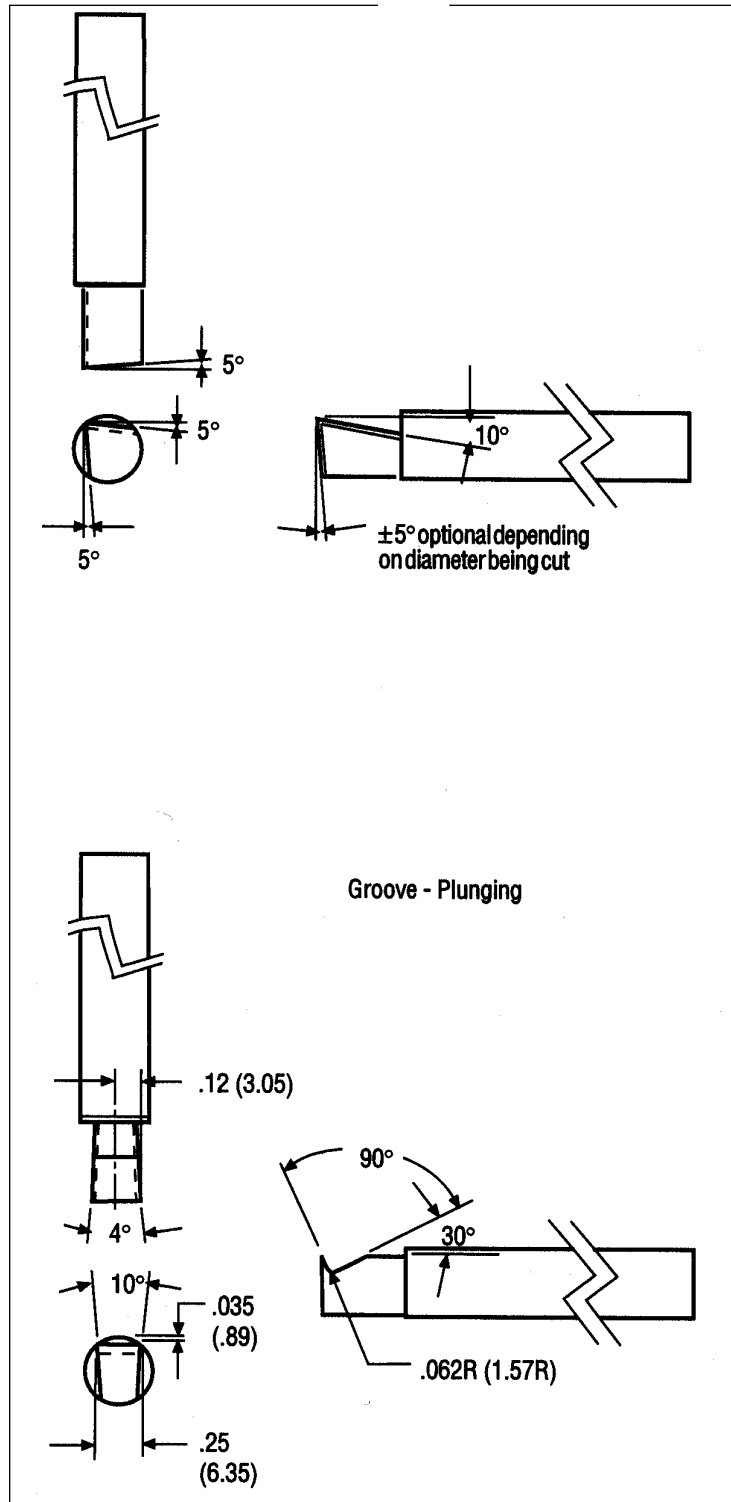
TOOL BIT GEOMETRY - INCH (MM)
